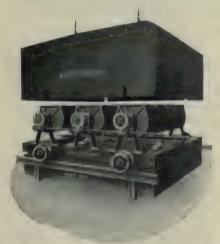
Sherardizing Machine Showing Dust Hood.
